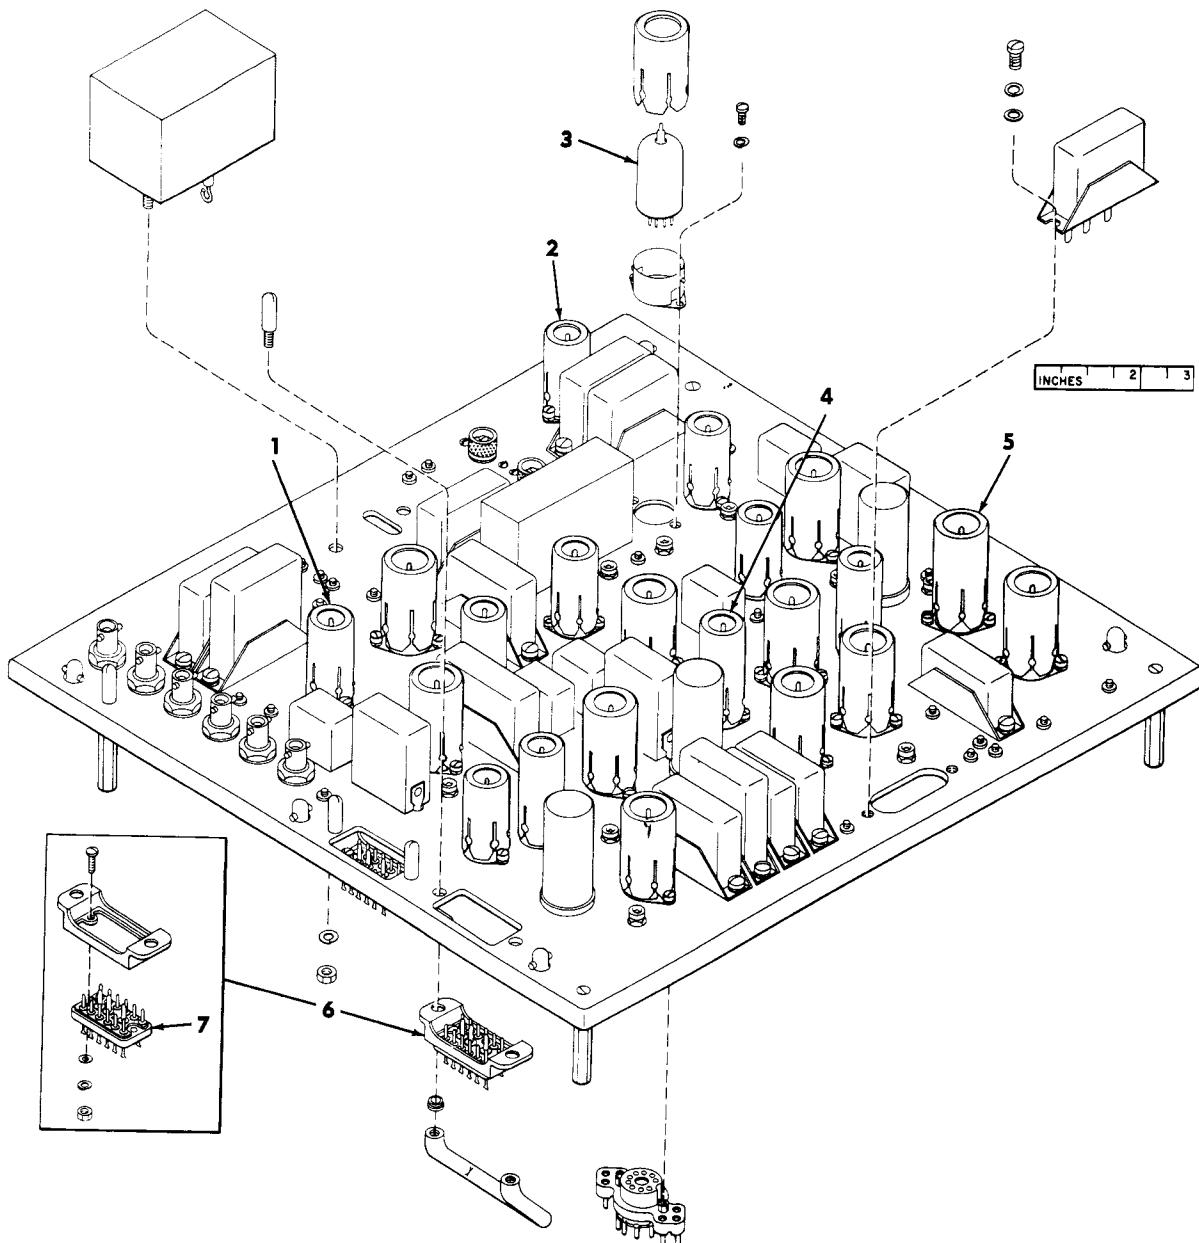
Synchronizer, electrical (9983937) - partial exploded view
